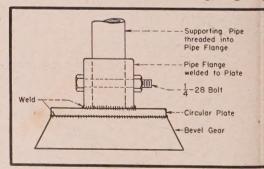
The antenna-supporting pipe should be botl welded and pinned to the bevel gear when the propitch motor is used.
